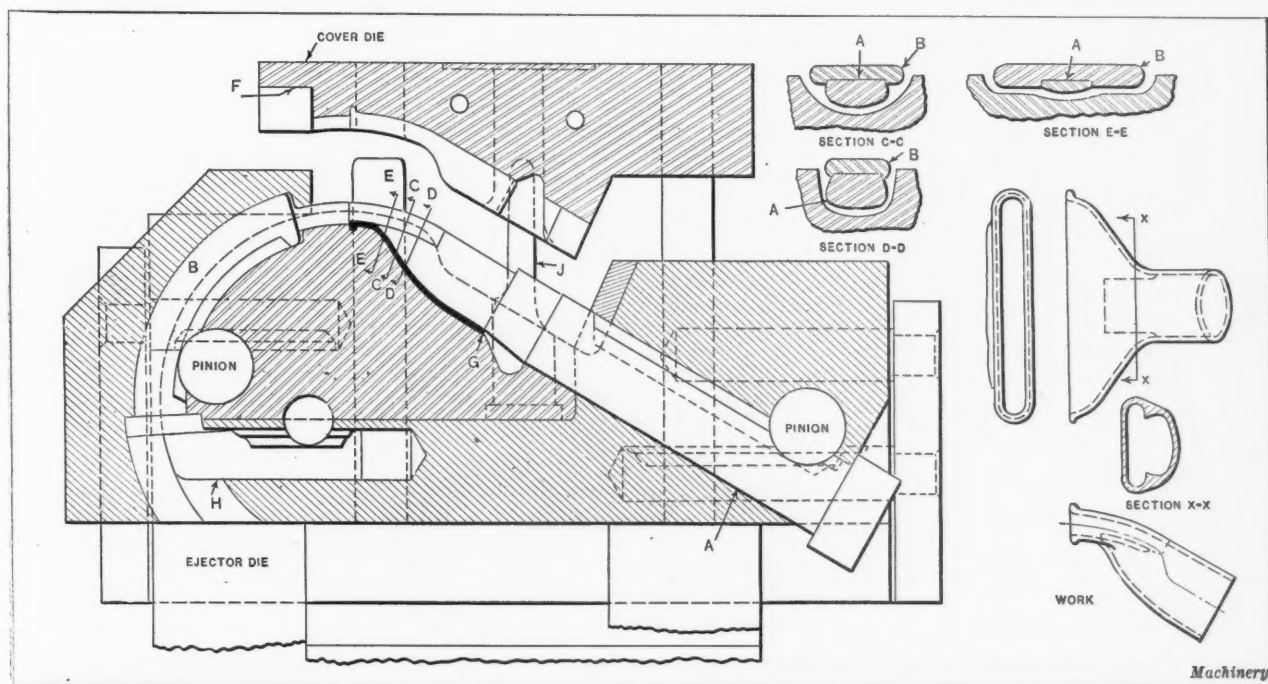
Sectional Views of Ejector and Cover Dies for casting an Aluminum Attachment Nozzle for a Vacuum Sweeper; also Views of the Work
